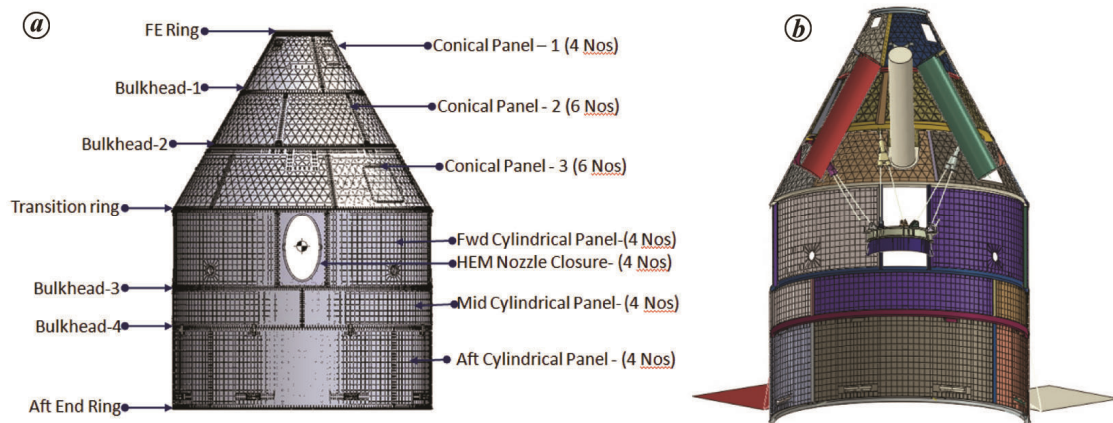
a, Crew Module Fairing (CMF) – external configuration. b, Sectional/internal view of CMF.
